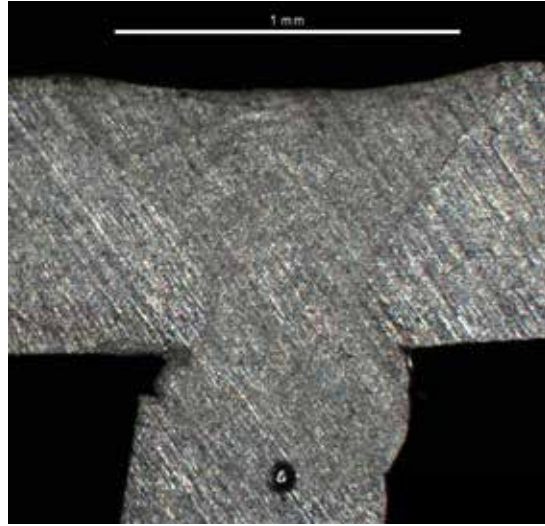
Laser-welded T-Joint with imperfections in the form of inclusion and wedge-formed welding toe.
